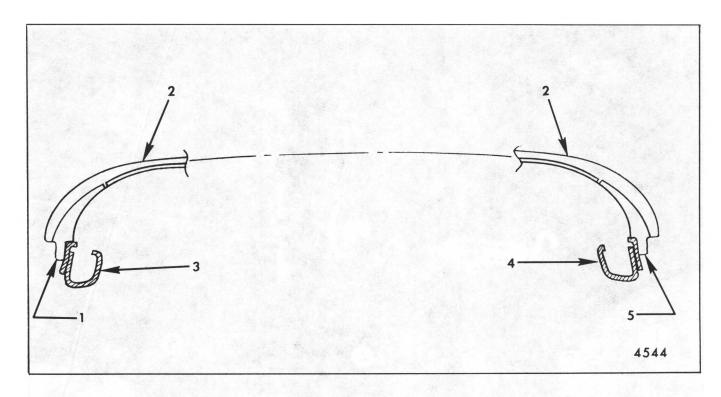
Cross Section of Side Rail to Center Bow Stop Alignment
